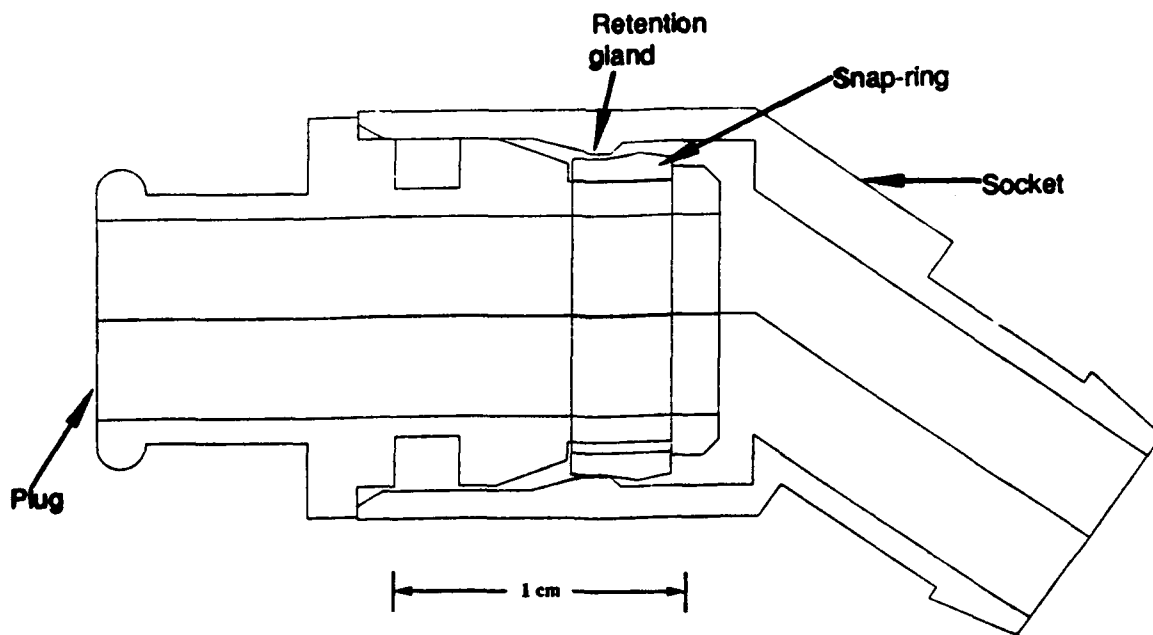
Line drawing of assembled miniature quick-disconnect assembly.
